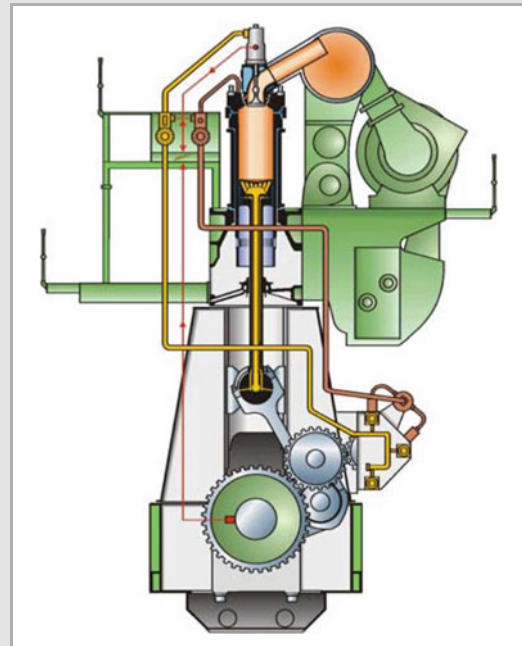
Configuration of a Wärtsilä RT-flex96C two-stroke diesel engine with a common rail injection system suitable for heavy fuel oil and an electronically controlled exhaust valve
